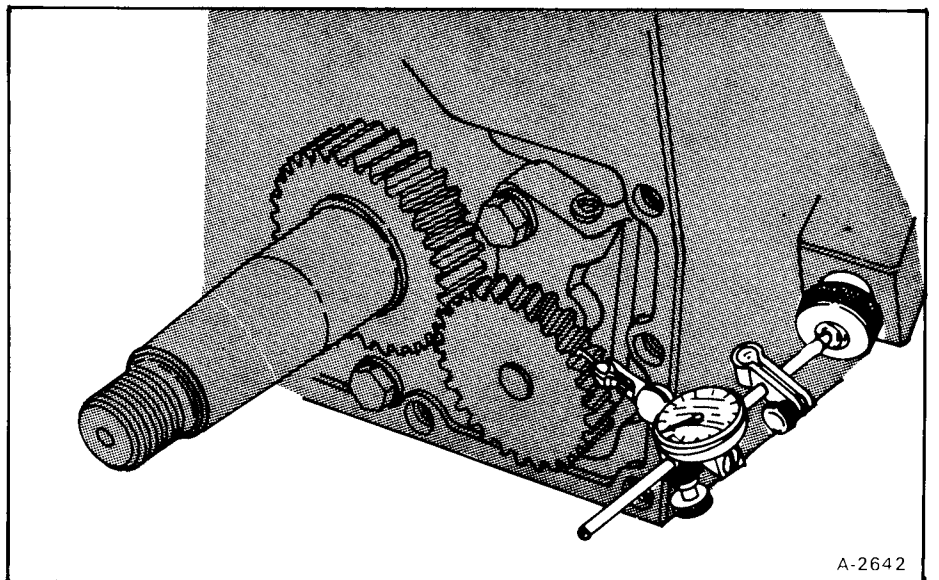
Adjusting Oil Pump Gear With Dial Indicator
